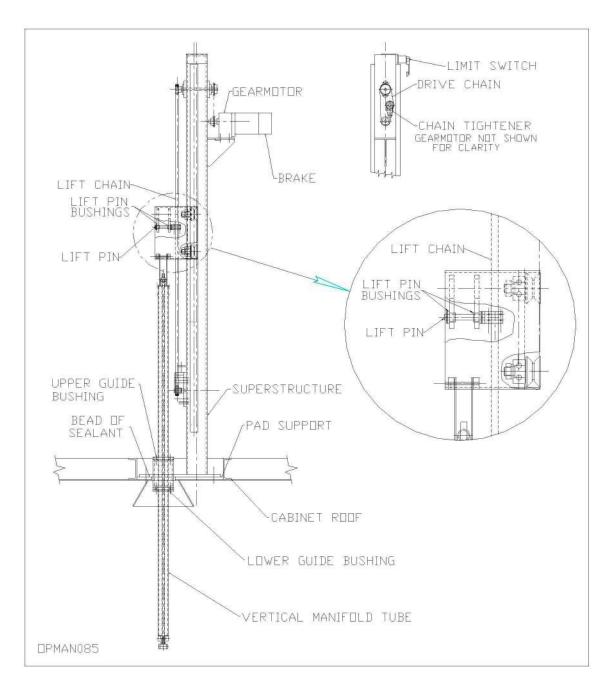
5: Center Manifold Mechanism and Superstructure
